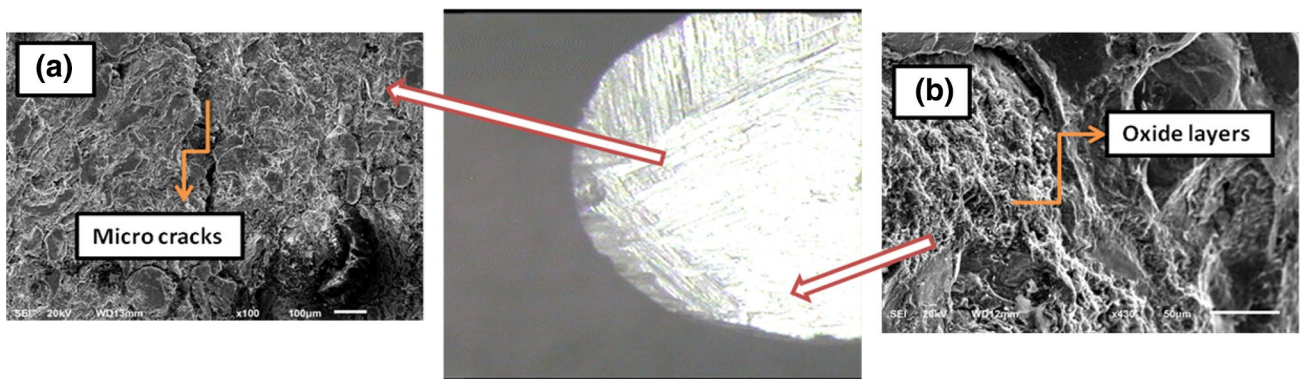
Typical SEM images of macroscopic and microscopic fatigue fracture surfaces of the slightly un-notched specimen of A356/5% RHA–5% fly ash hybrid composite
